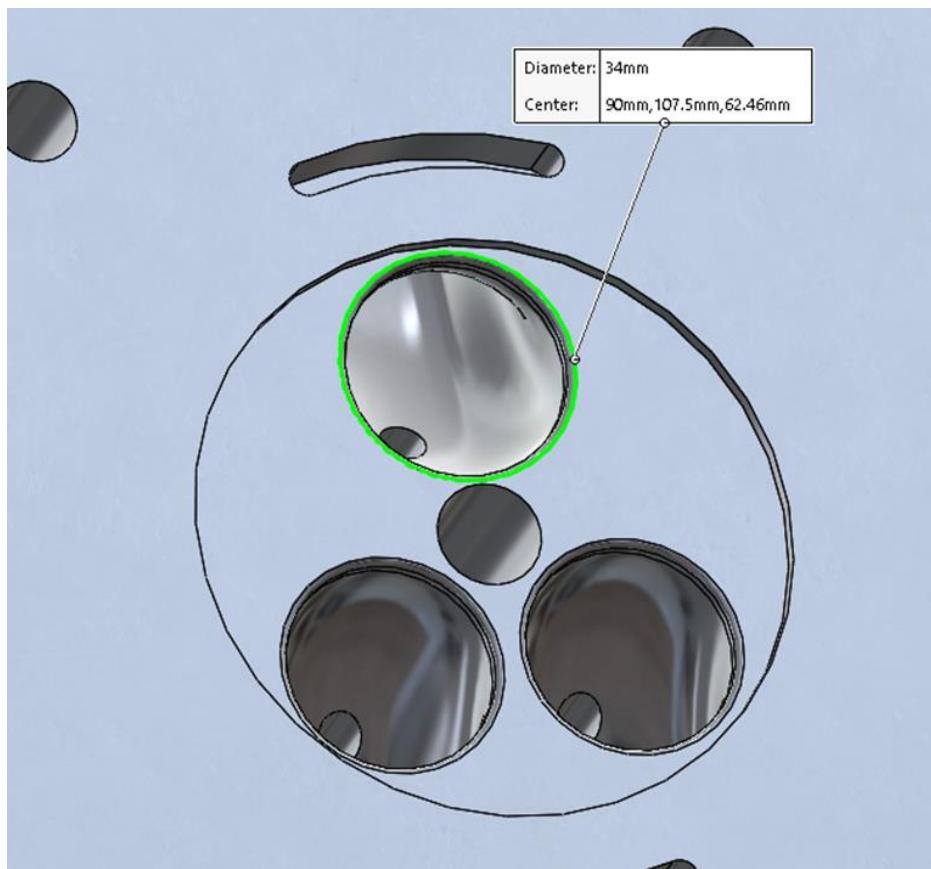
CAD and dimension of the exhaust valve designed and to be optimized in 2024 year.
